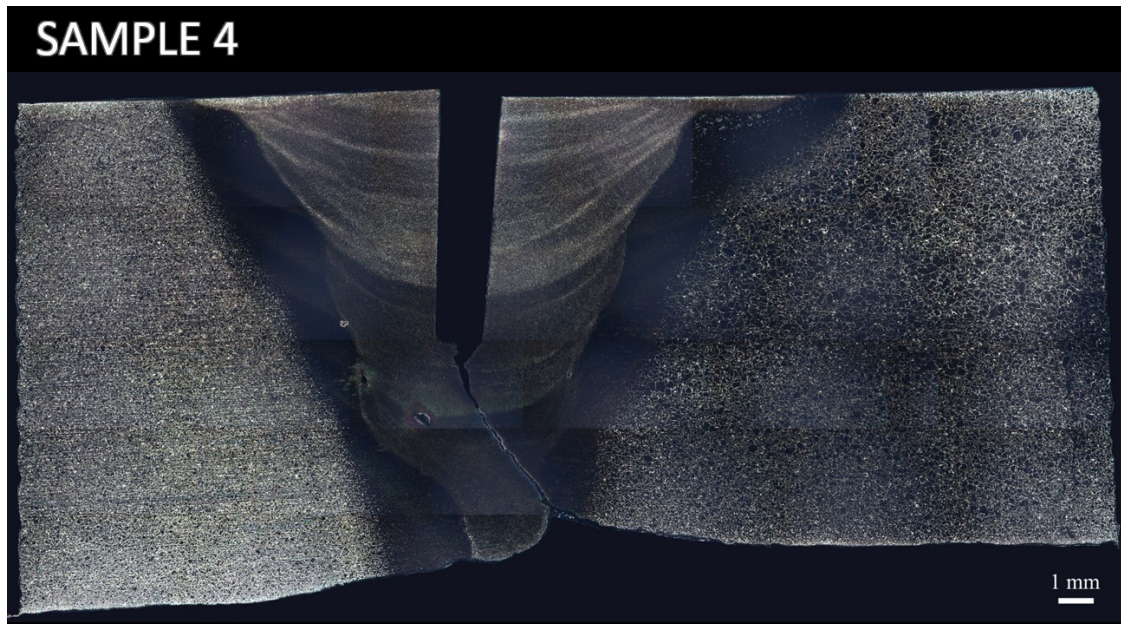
Photo of sample 4 showing through fracture Crack path through weld metal final fracture appears to be through HAZ.
